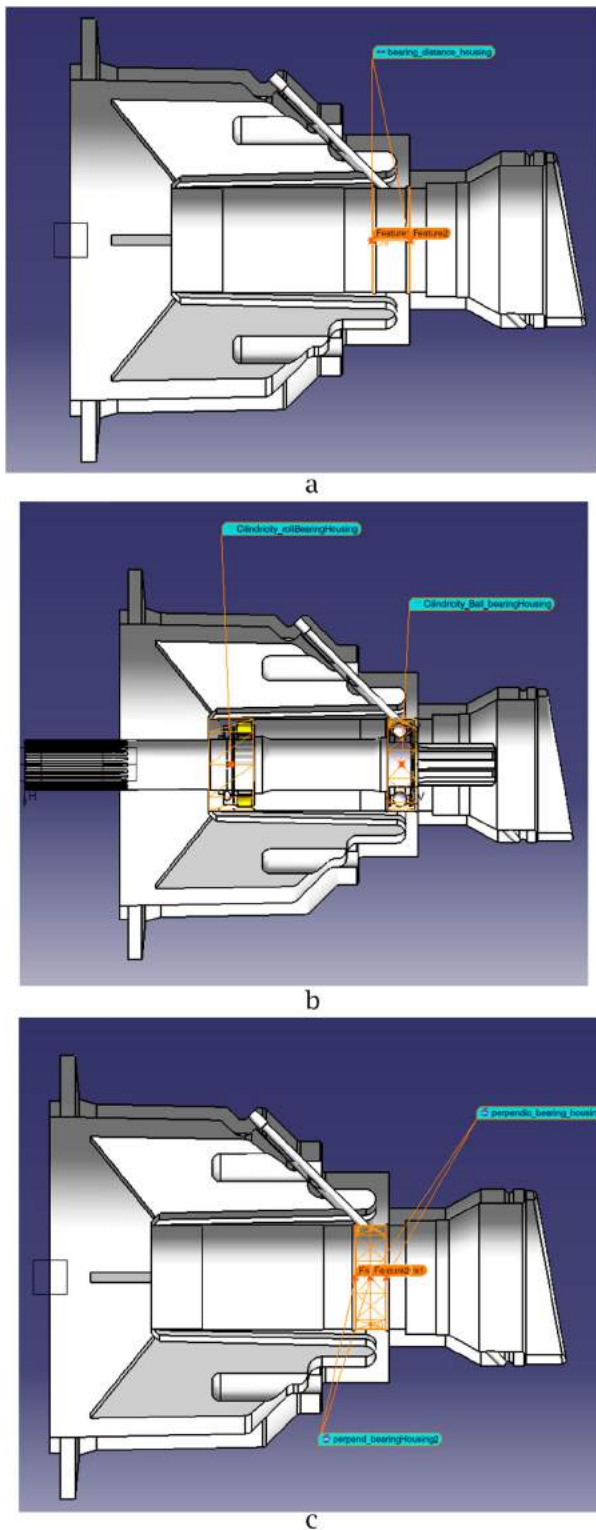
(a) Dimensional tolerances on the case. (b) Cilindricity of bearing housings on the case. (c) Perpendicularity of shoulder housings.
